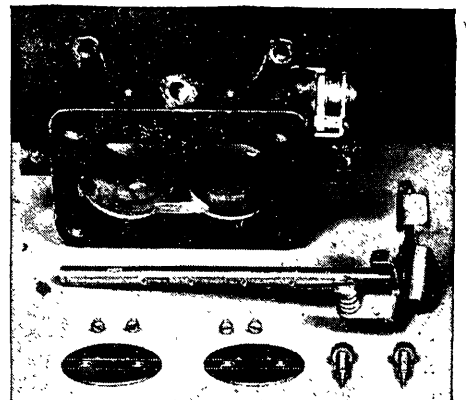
Remove idle needle valves and springs. Scrap needle valves. Mark throttle valves and barrels as outlined in text. Each valve will be reassembled in same barrel. Throttle valves and throttle shaft. Inspect all parts as outlined in text and in reassembling use all parts included in Repair Kit and any additional that inspection shows to be unfit for further use
